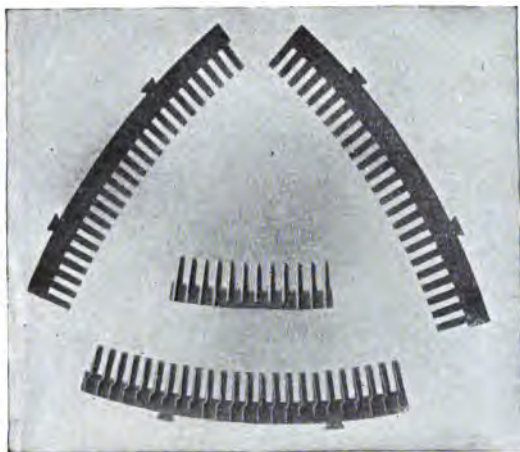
Segments of Core Laminations, Finger Plate and Ventilating Finger Plate (Westinghouse).
